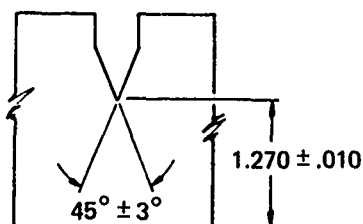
SHORT NOTCHED BEND SPECIMEN
